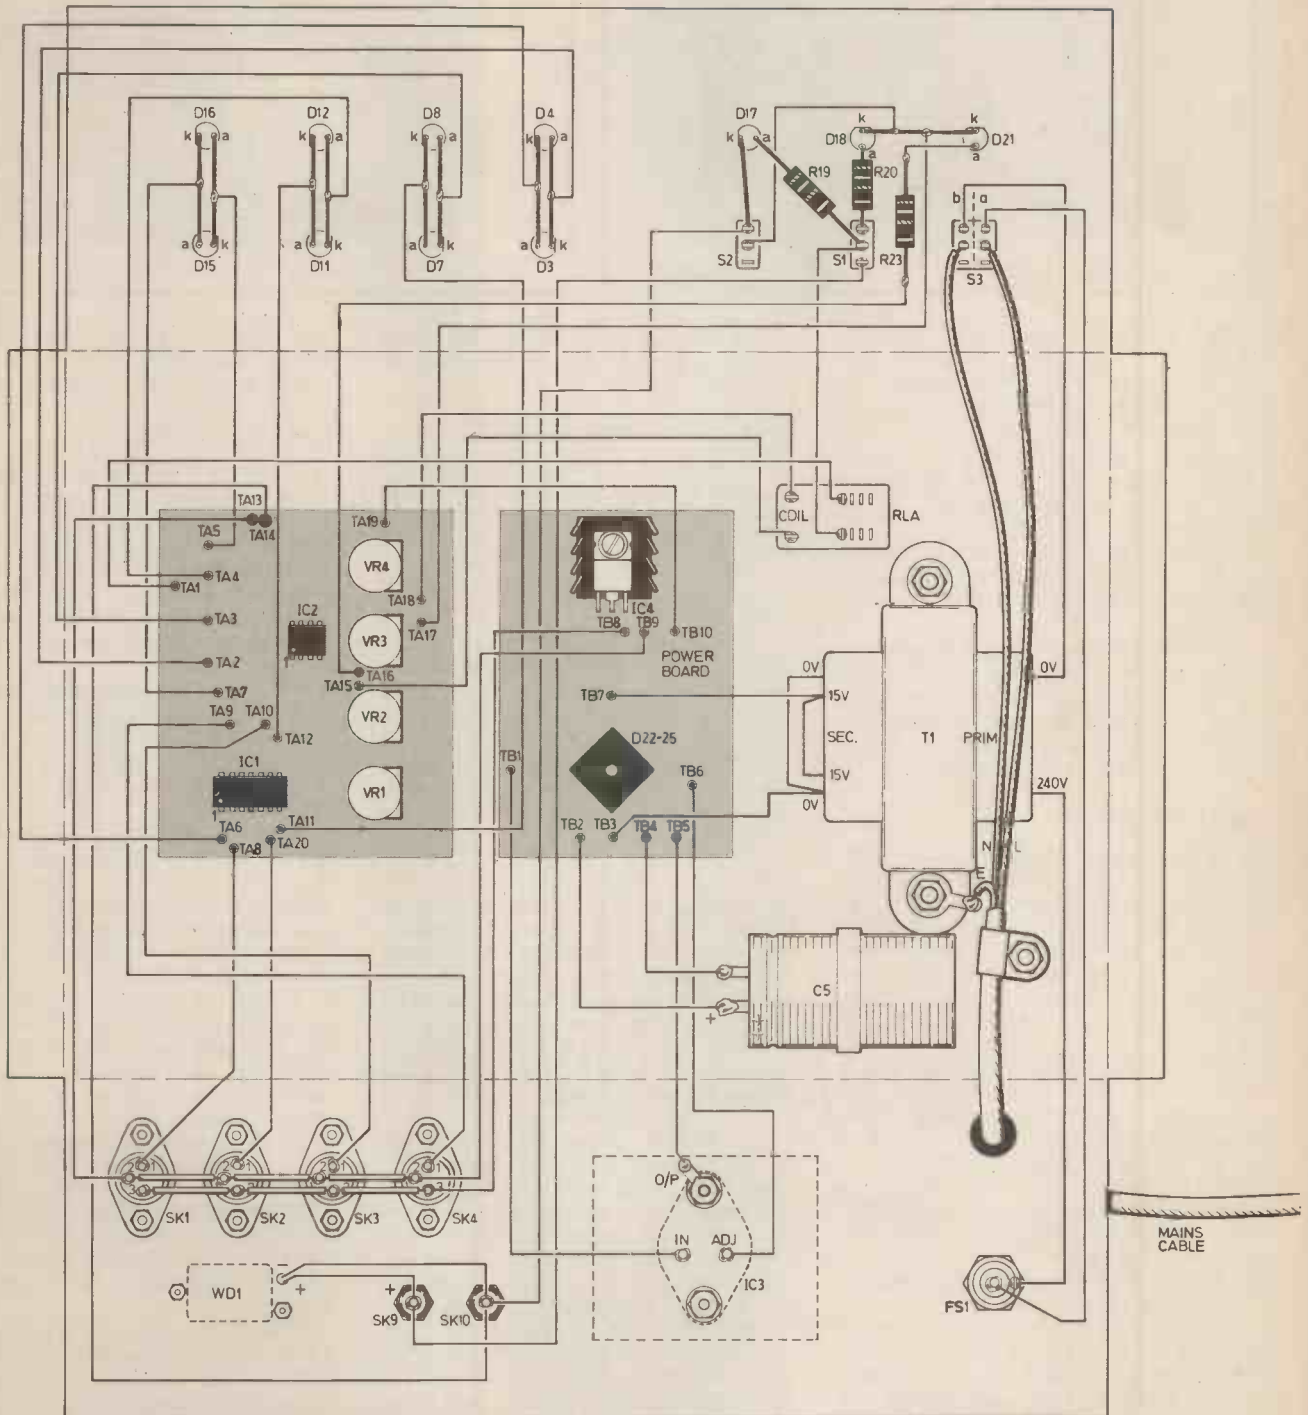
Interwiring between the two boards and the chassis-mounted components.
